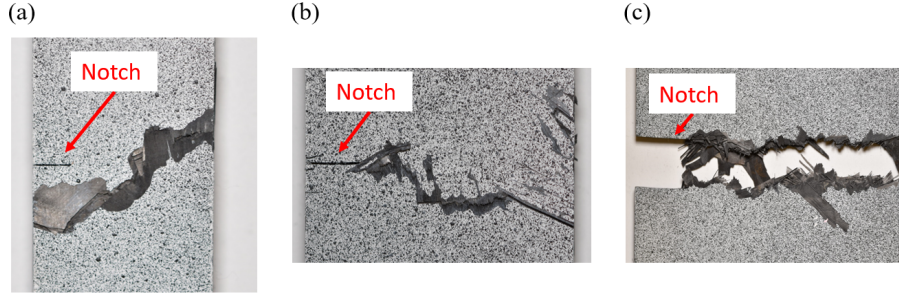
Fracture surfaces of the 50×8 mm platelet size specimens. (a) $D = 20$ mm showing notch insensitive, (b) $D = 40$ mm, (c) $D = 120$ mm
